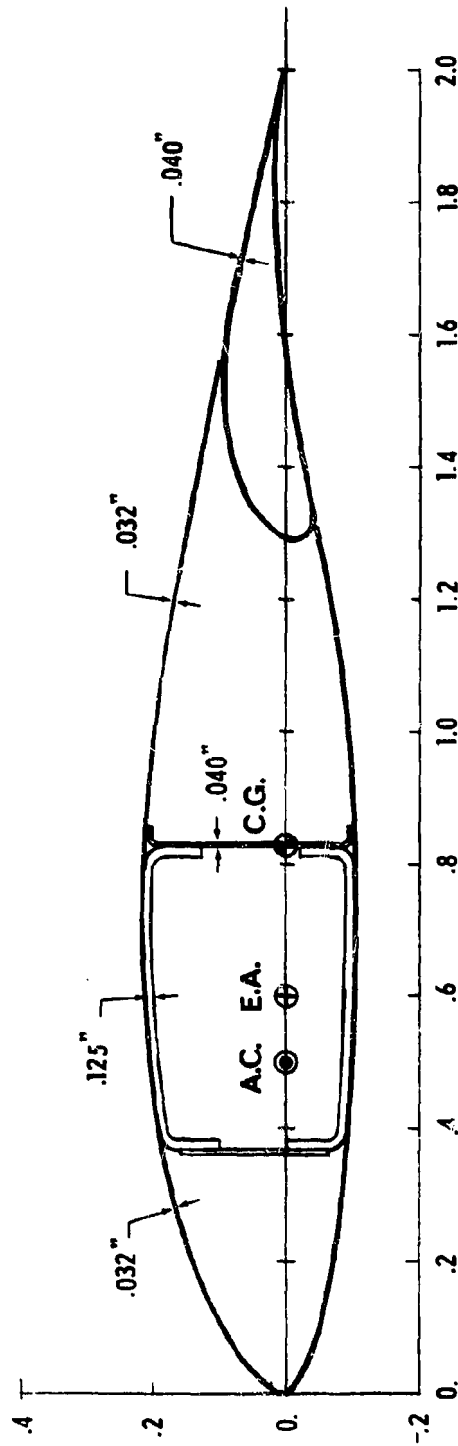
Typical Wing Section of Gemini Sailplane Used to Determine the Six Dimensionless Parameters, Construction is Aluminum of Indicated Thickness, Dimensions are in Feet
